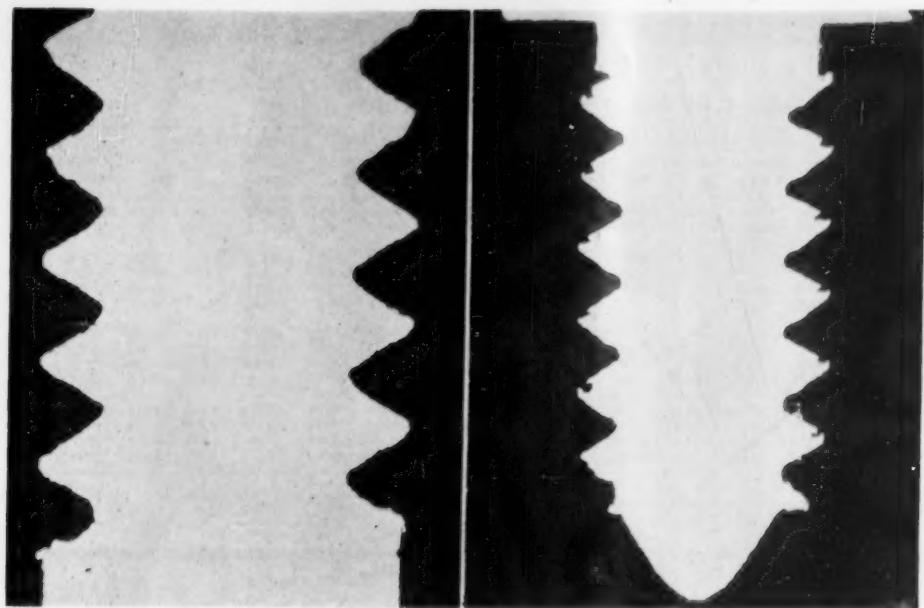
Sections of miniature screw threads: die-cut, stainless steel, 339 threads per inch; spun thread, 282 threads per inch.
